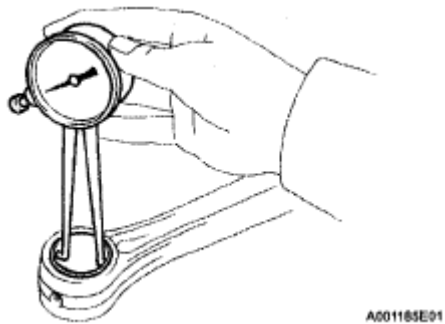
Measuring Connecting Rod Small End Bore Diameter
